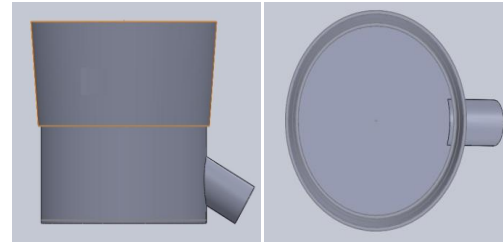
Air Inlet Pipe at 30° inclined horizontally cooling tower model
